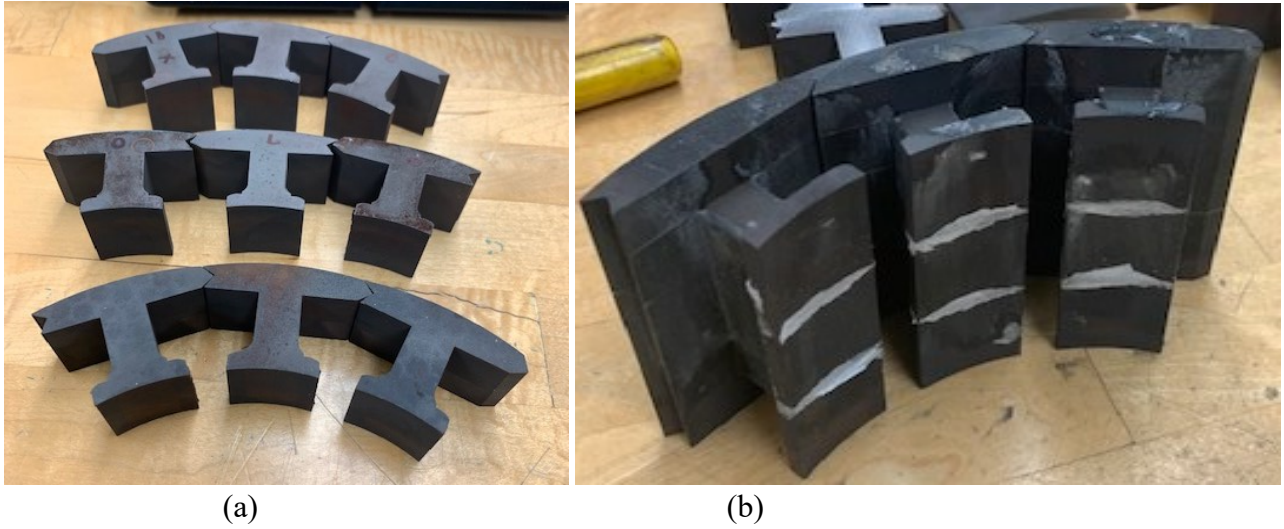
SMC tooth (a) Manufactured tooth segments (b) Glued tooth segments.
